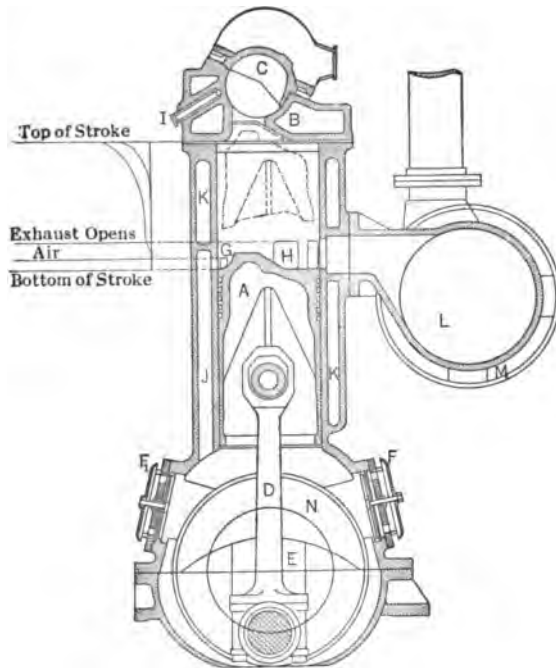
Beardmore two-cycle type. (A) Piston. (B) Cylinder cover. (C) Combustion chamber. (D) Connecting rod. (E) Crank. (F) Air inlet valves. (G) Scavenging air ports. (H) Exhaust ports. (I) Fuel injection nozzle. (J) Scavenging air passage. (K) Water jacket. (L) Exhaust silencer. (M) Water jacket. (N) Balance weight.
